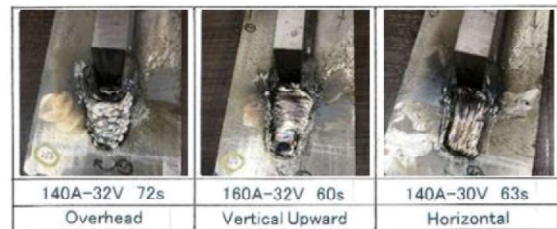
Example of boxing weld elongated bead weld for every welding position
